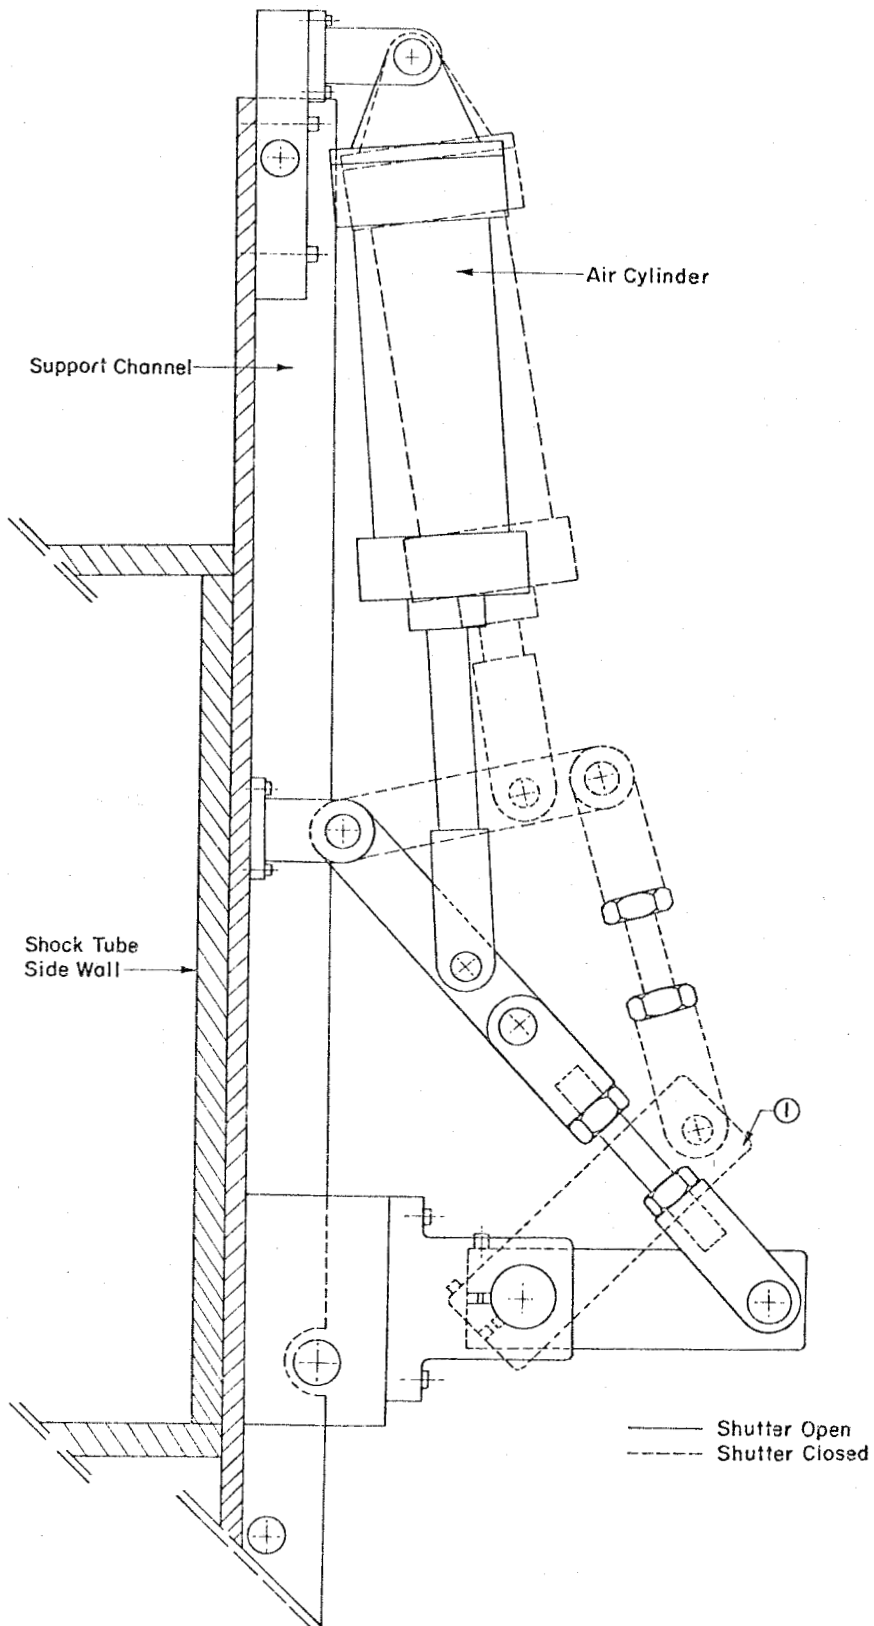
SCHEMATIC OF SHUTTER DRIVE MECHANISM
